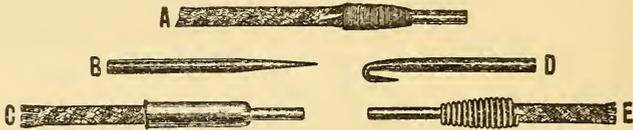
DETAILS OF RECEIVER CORD TIP.
